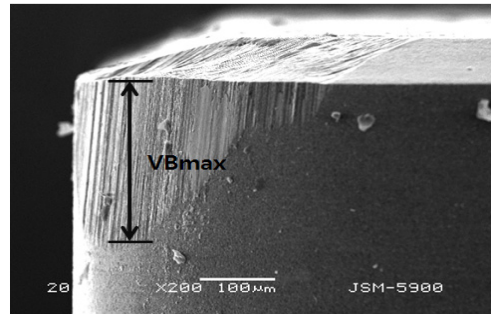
Flank wear on CBN cutting tool(x200)(v=130m/min, f=0.157mm/rev)
